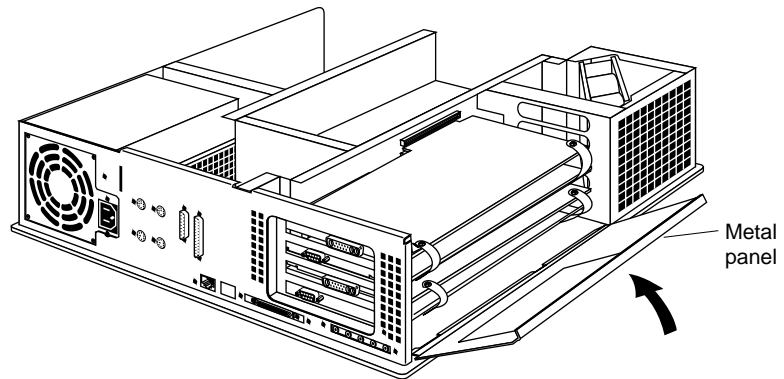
Closing the Metal Panel in Front of the Graphics Boards
